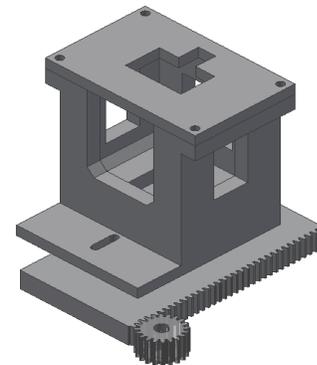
Model of the rotational motor housing on top of the rack and pinion.
